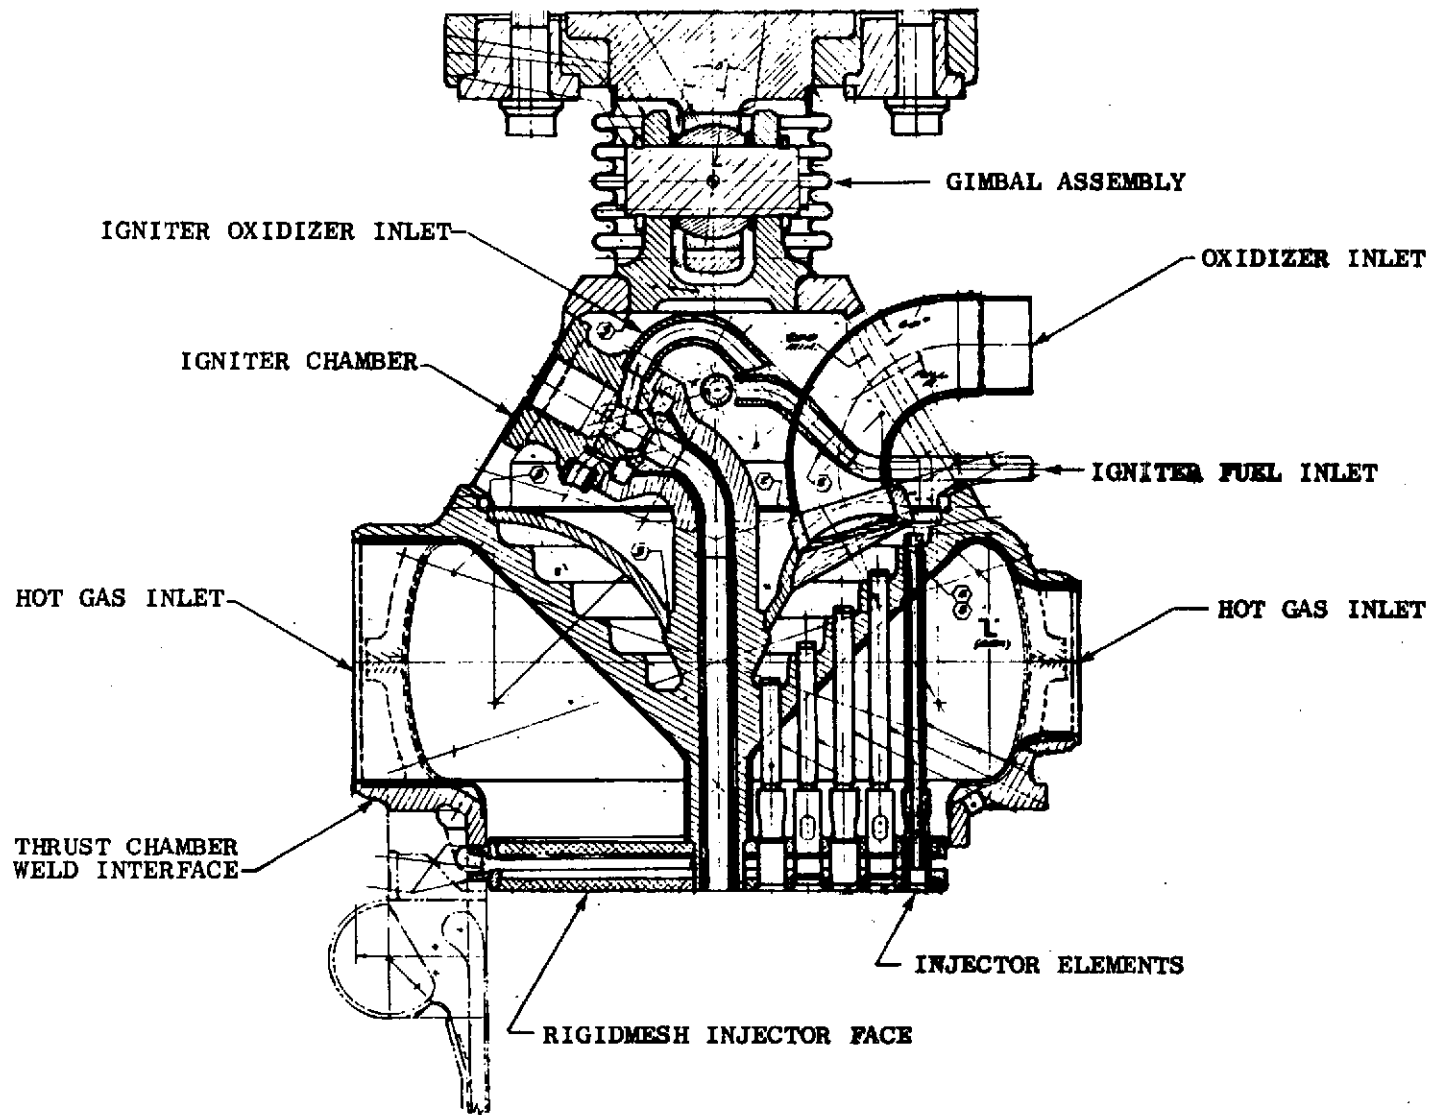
Thrust Chamber Injector and Gimbal Assembly
